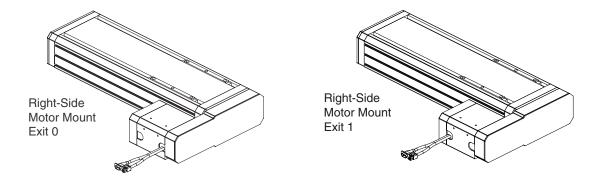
Right-Side Motor Mount, Harness Exit Locations
